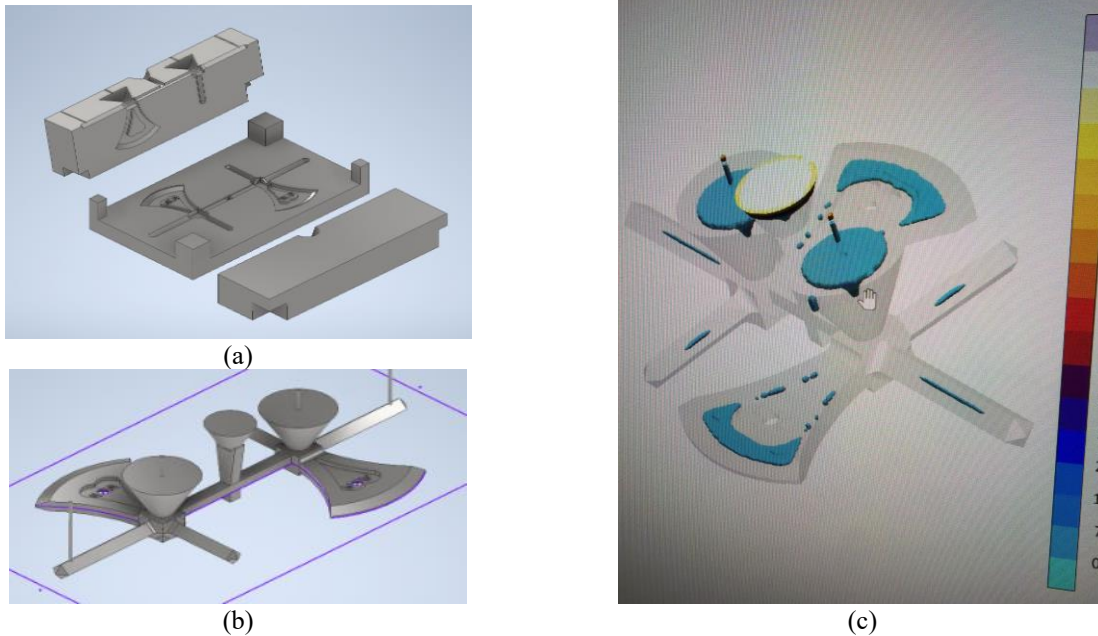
(a) 3-Part sand mold CAD design, (b) Sand mold gating and riser design, and (c) MAGMA simulation for the sand mold gating.
